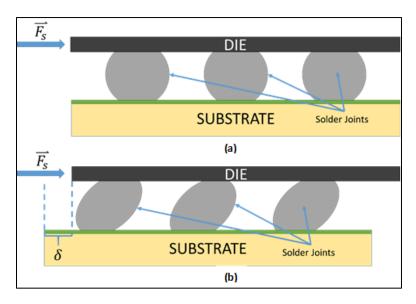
(a) Position of solder joints in untested sample. (b) Deformation of solder joints and die deflection (δ) after prolonged stress cycling.
